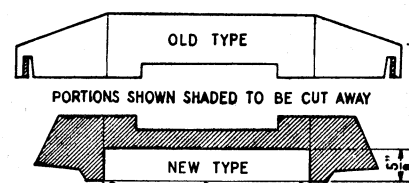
Illustration Showing Method of Cutting Light Diffusion Plate
